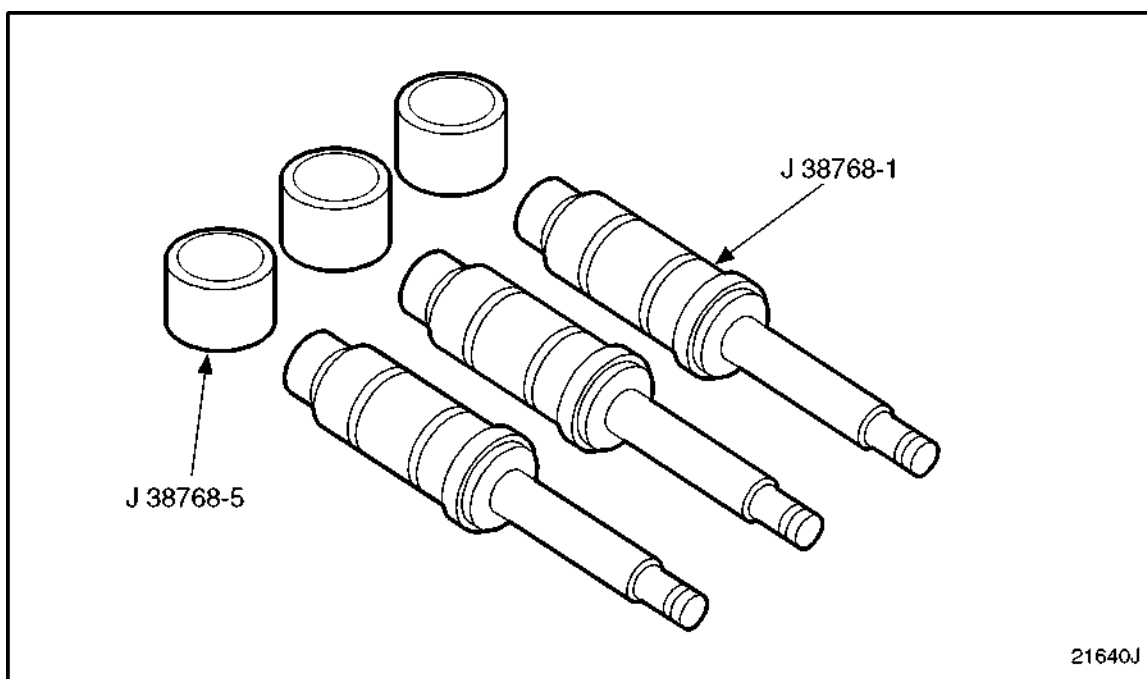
Cylinder Compression Test Adaptor Set, J 38768
